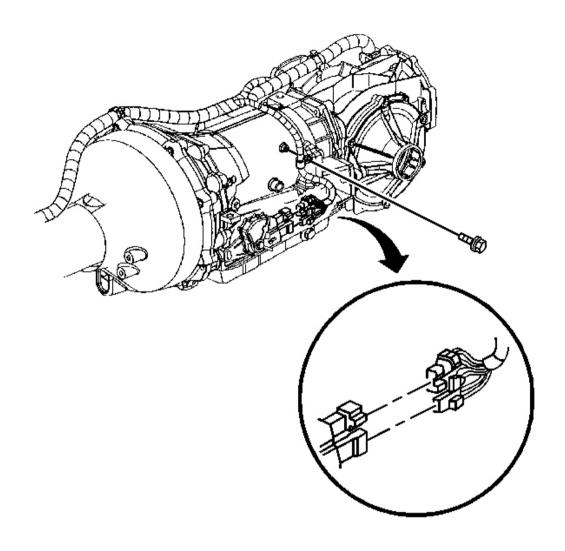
Park/Neutral Position Switch Electrical Connectors Courtesy of GENERAL MOTORS CORP.
